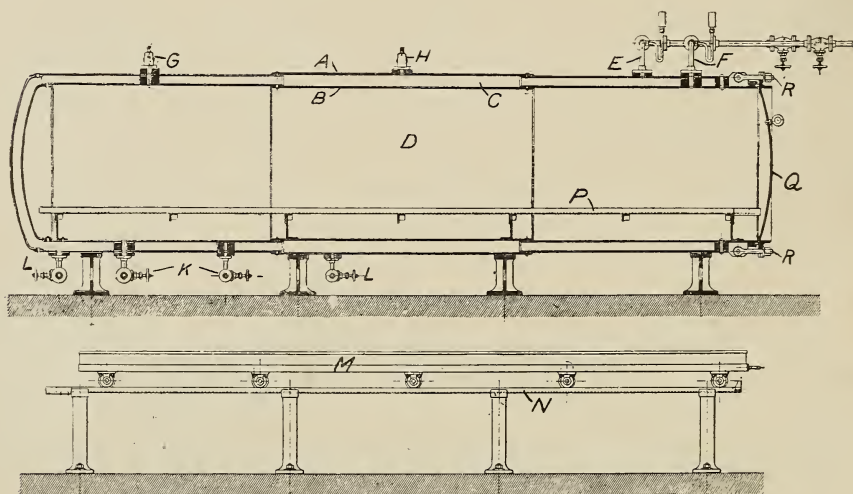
HORIZONTAL JACKETED VULCANIZER.
